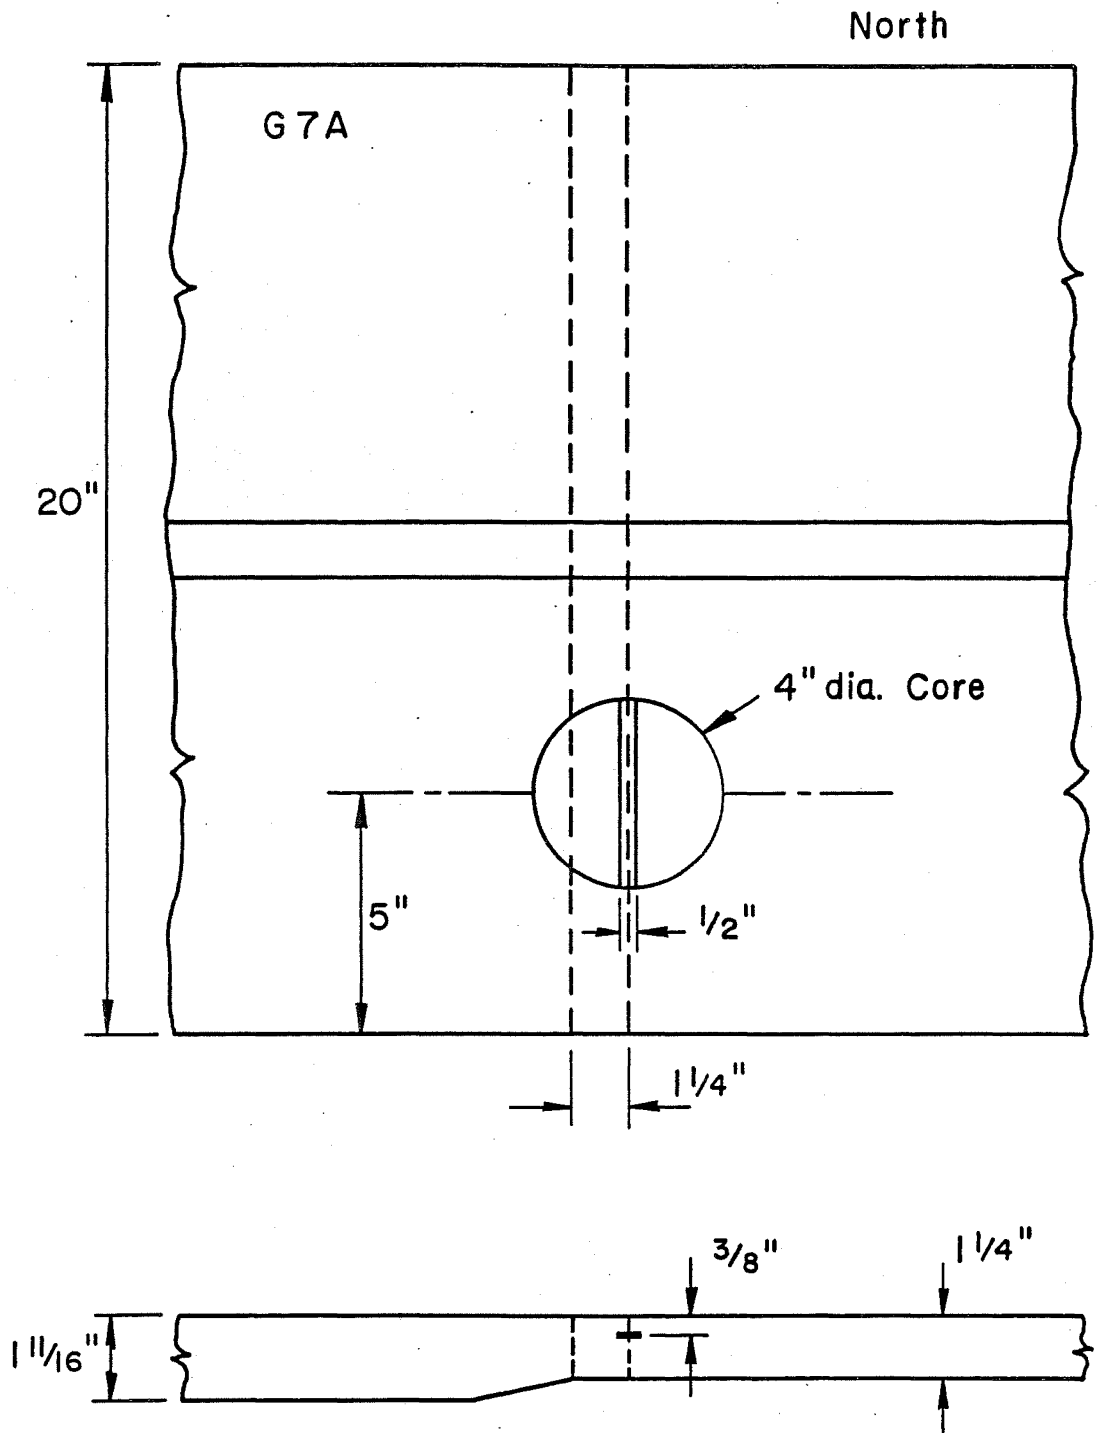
Location of Defect in Multipass Weldment G7A
